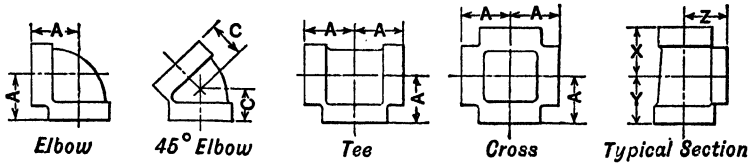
125-lb. Cast-Iron Screwed Fittings.
